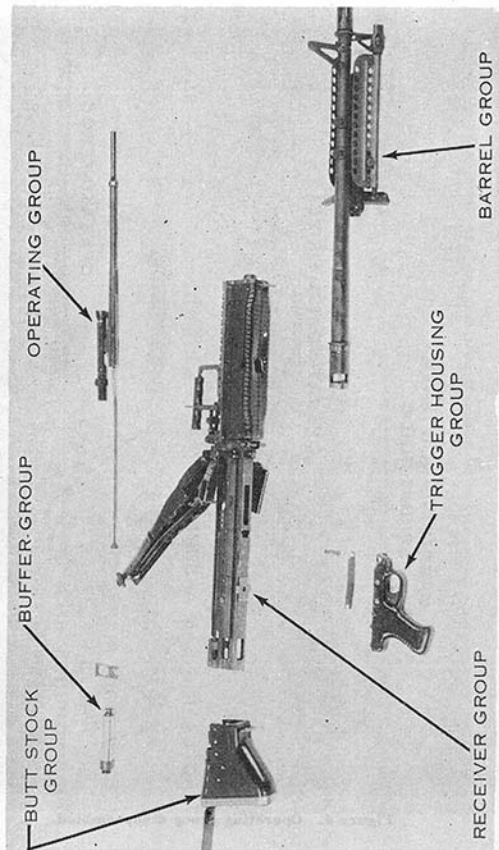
Machinegun, 7.62mm M60, disassembled into six major groups.
